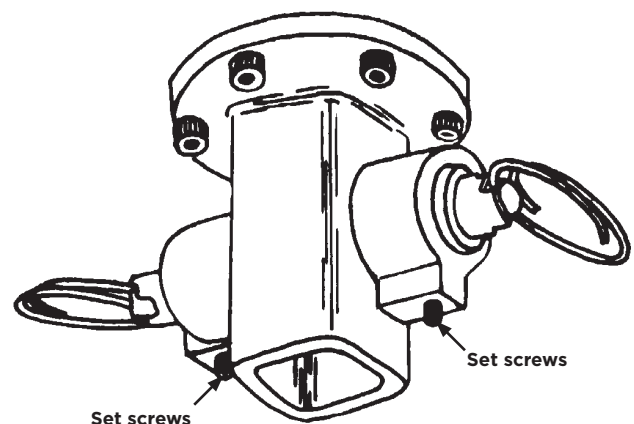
Isometric View Of Locking Dog Assembly Showing Set Screw Locations
